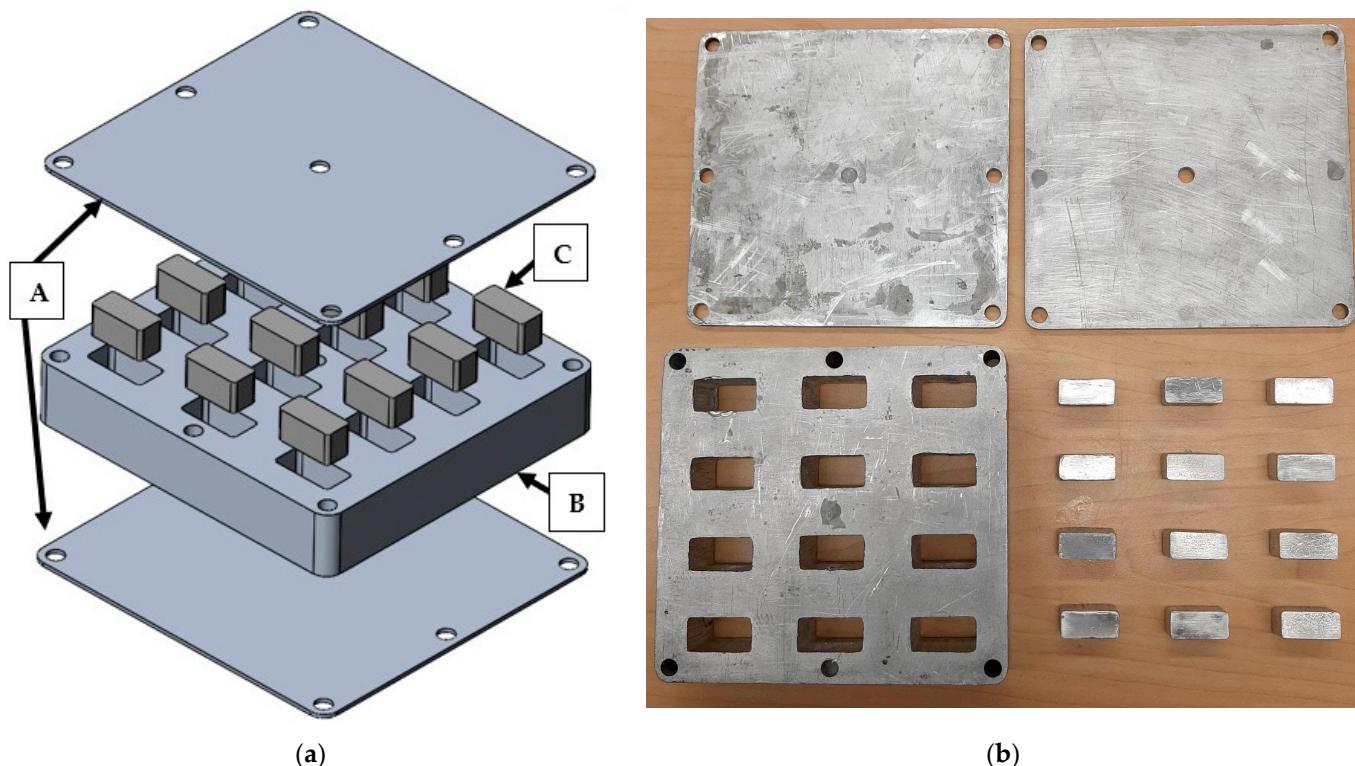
Laser-cut aluminum mold components and alignment orientation. (a) 3-D render and (b) physical components of (A) Mold Lid X2, (B) ASTM D695 Pocket Mold, (C) Mold Plug X12.
